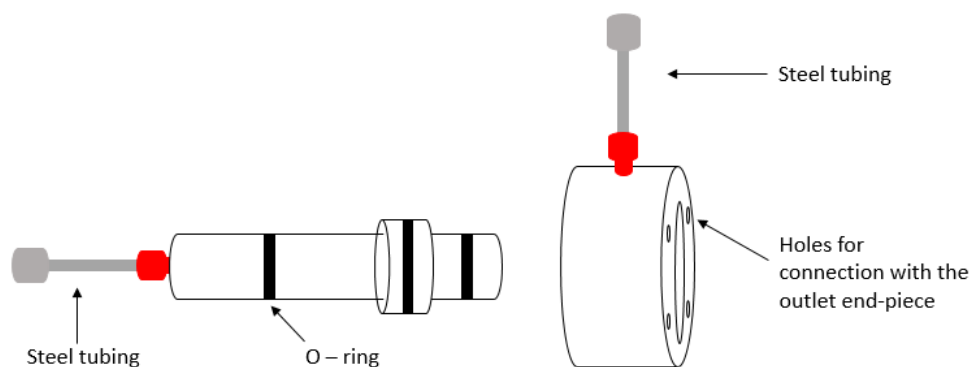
Hydraulic inlet end piece consisting of two parts. Inner part (left) and outer part (right).
